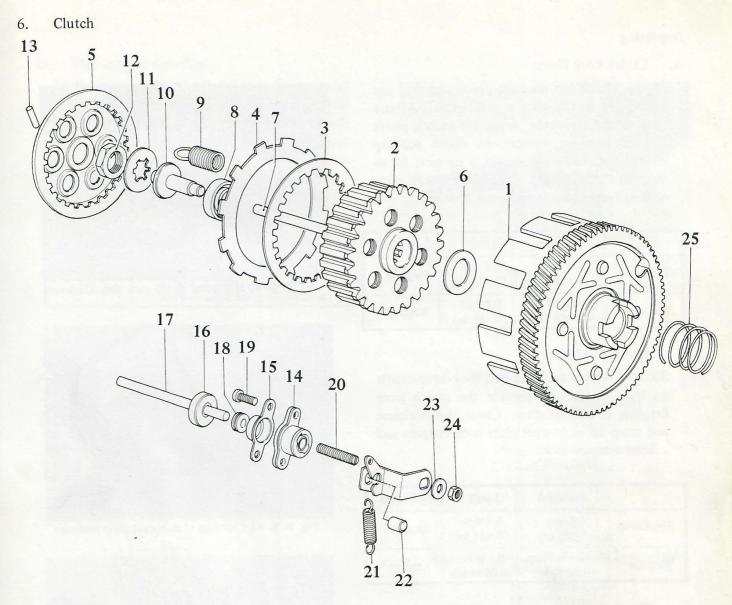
Exploded view of TS100/TC100 clutch
